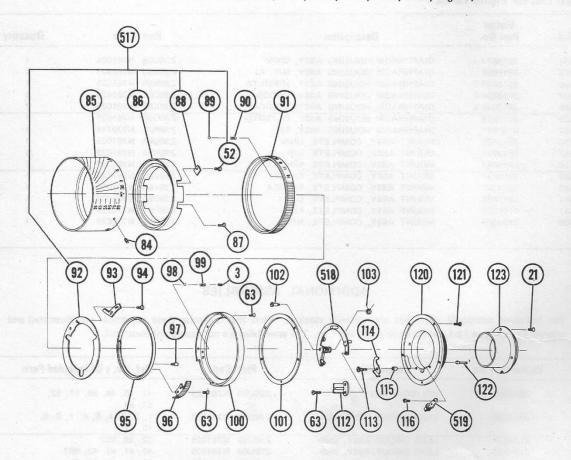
Universal Mount Assembly, Complete (Ref 536, Pg 55)
